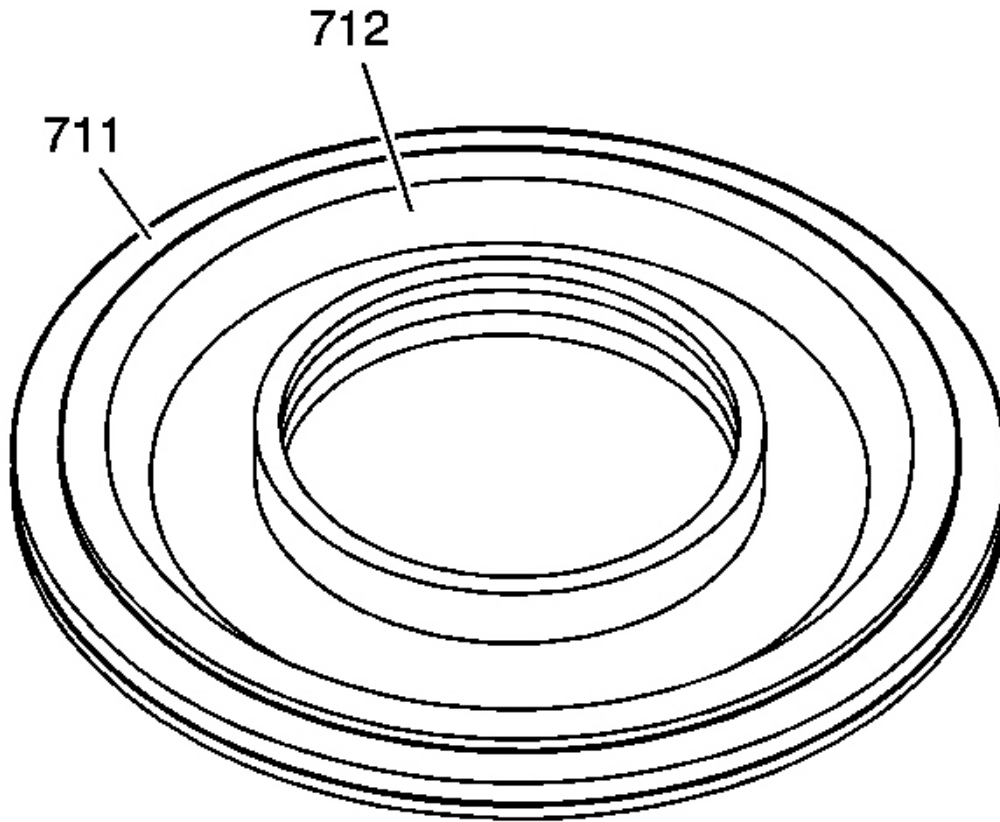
Coast Clutch Piston Spring & Washer Plate
